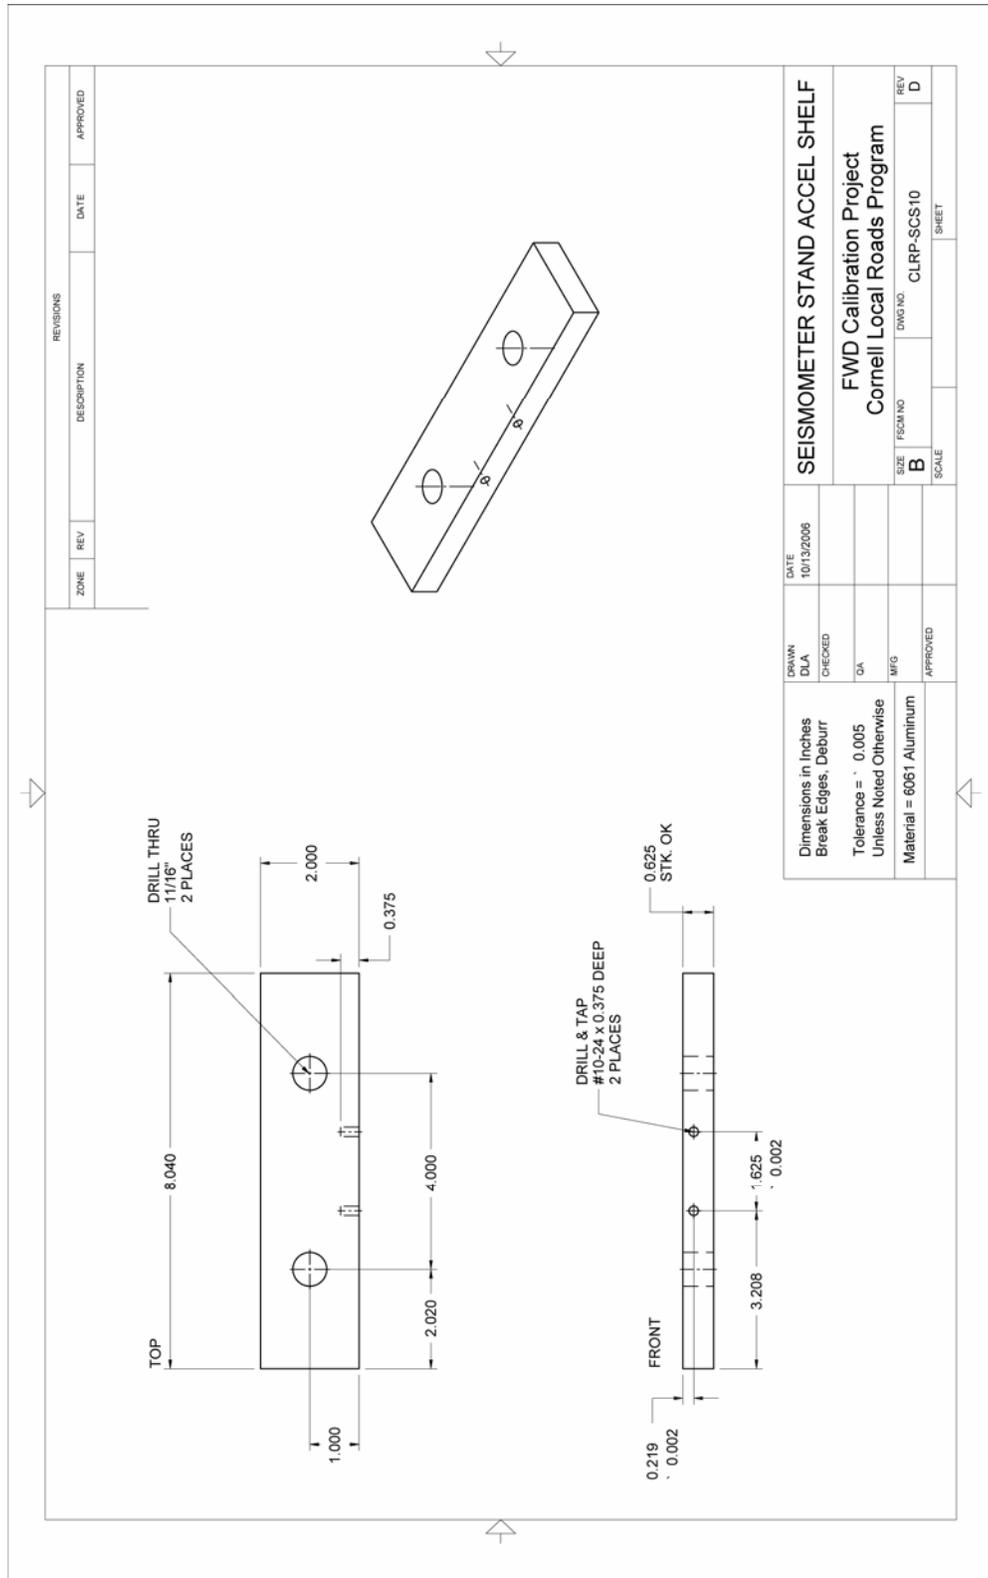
Drawing. CLRP-SCS10 Seismometer Stand Accelerometer Shelf.
